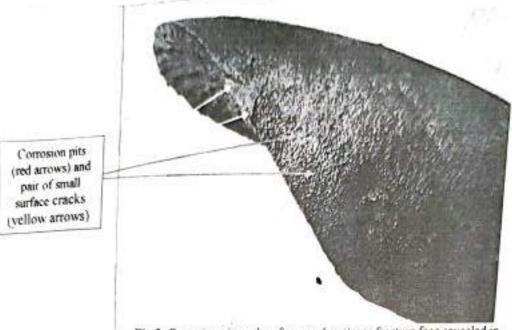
Corrosion pits and surface cracks at/near fracture face revealed in macro-examination.
